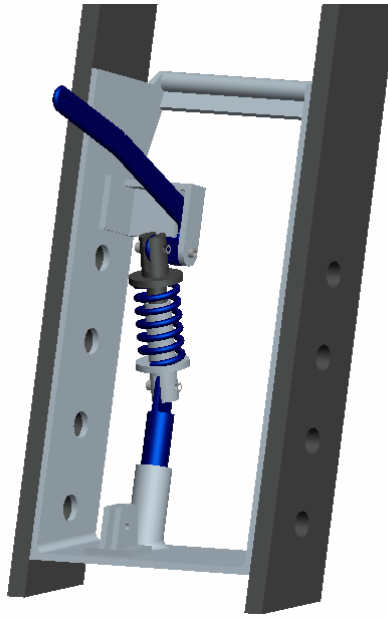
Arm, Frame, and Latch Mechanism Assembly
